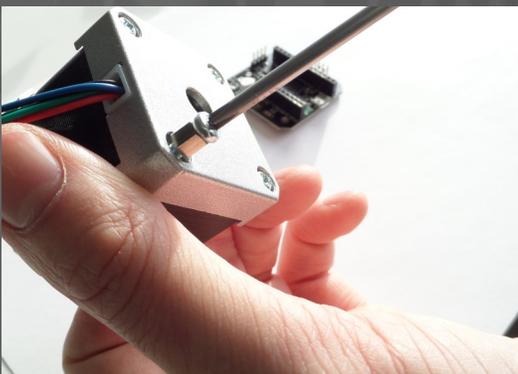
Screw the assembly of rod, stand-off and philips screw into the motor. Make sure NOT to over-tighten!
